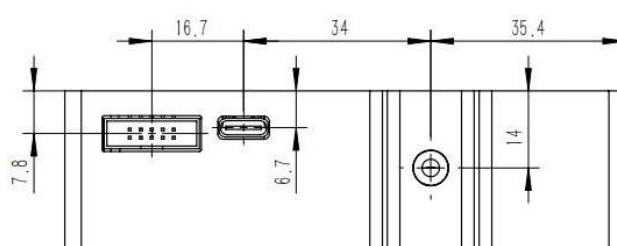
Mechanical Dimension Drawing (Horizontal view)
